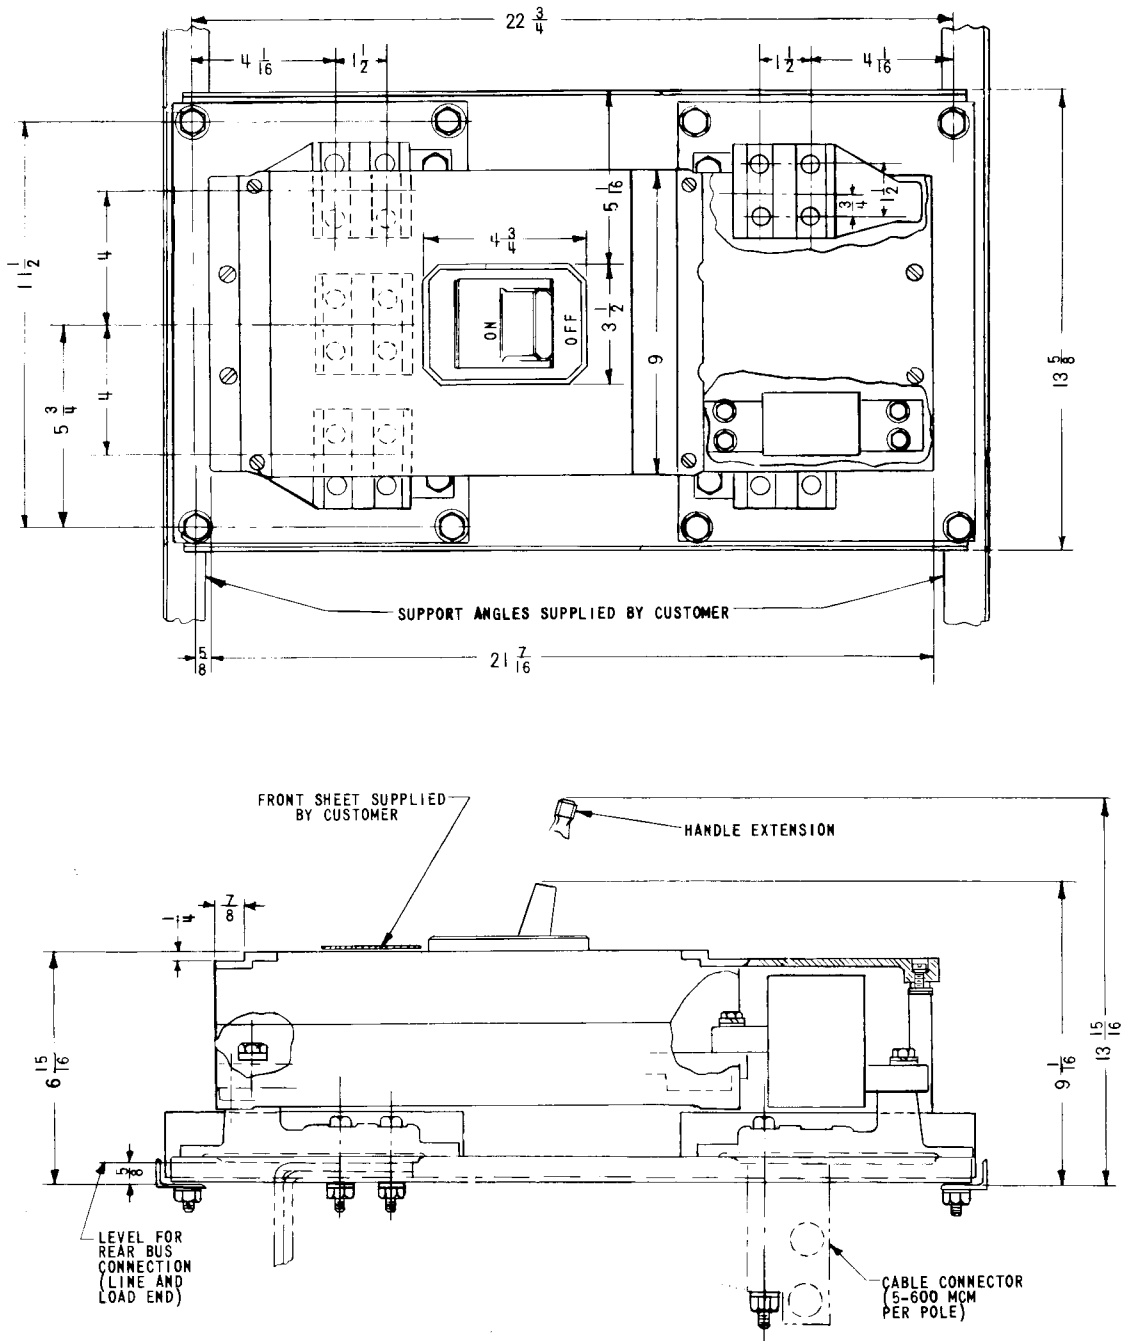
1600-Ampere CP-Frame Circuit Breaker Dimensional Drawings with Connect-All Assembly
